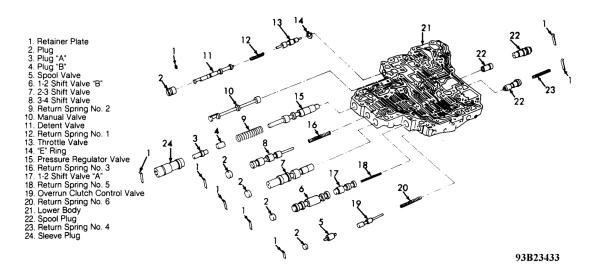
Exploded View Of Control Valve Lower Body Courtesy of NISSAN MOTOR CO., U.S.A.
